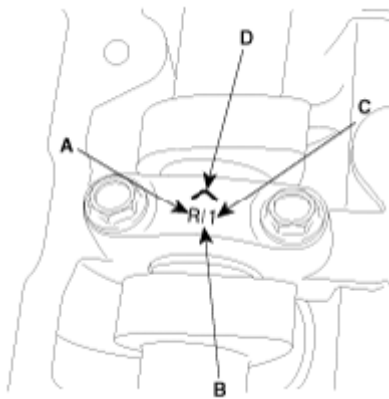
Identifying Right, Left Bank, Intake And Exhaust Side Assembly
